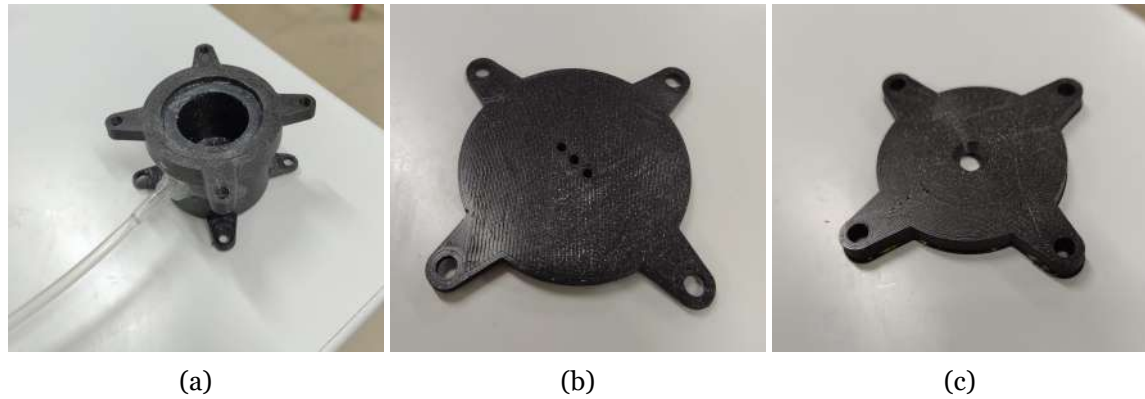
Parts fabricated with PLA. a) Body part; b) Superior lid part; c) Pinhole holder part.
